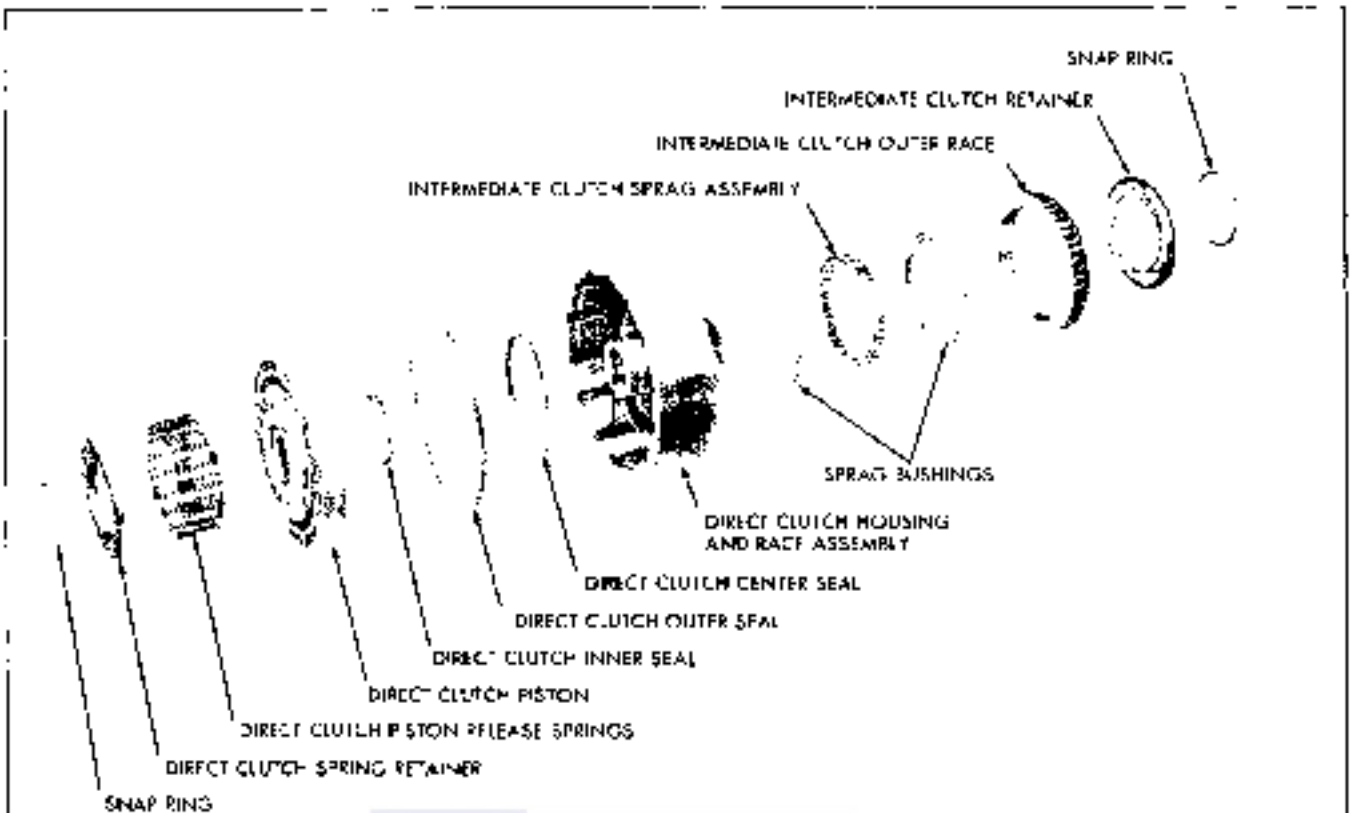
E-91 Exploded View of Direct Clutch and Intermediate Sprag
